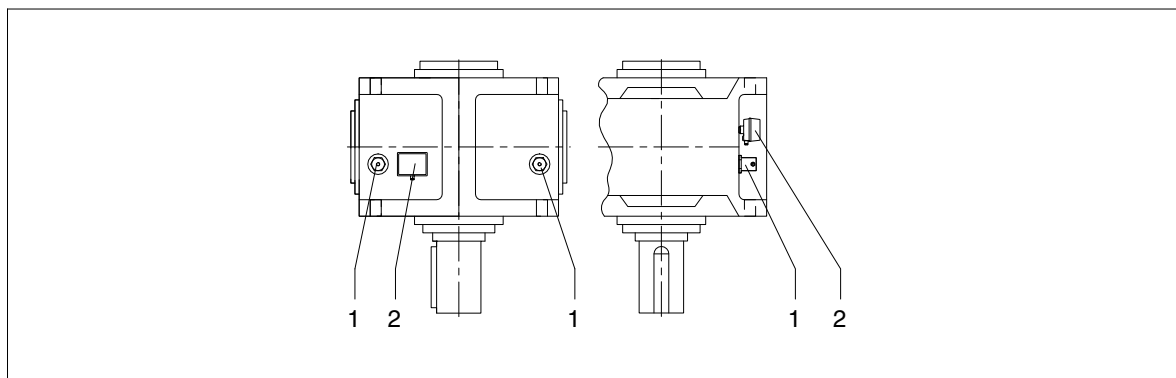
Heating on gear unit without oil-equalising tank of types H..V and B..V
